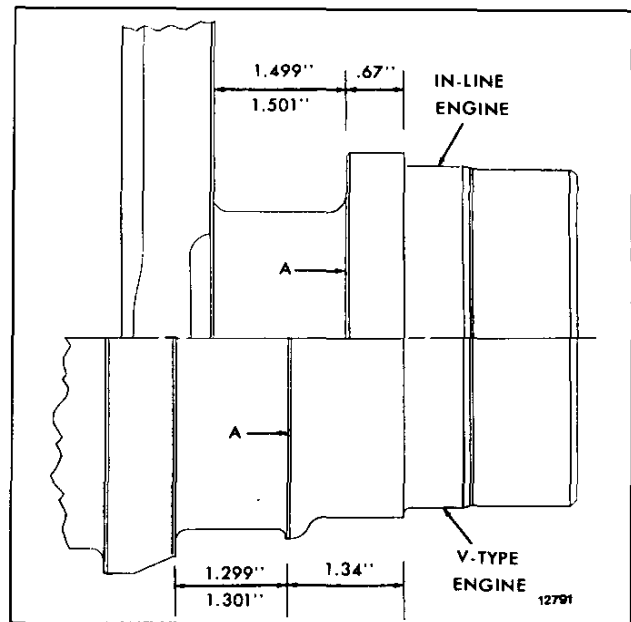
Standard Dimensions at Crankshaft Thrust Surfaces - In-Line and V-Type Engines
